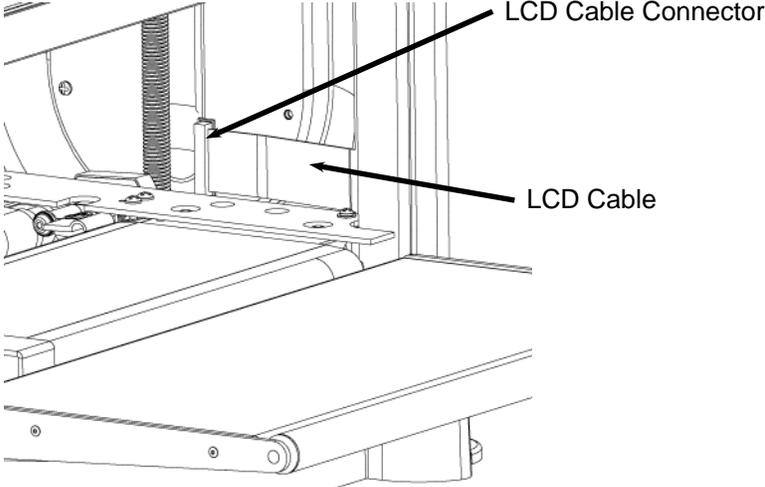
LOCATION OF CONNECTOR FOR HEAD COVER CABLE FOR THE EARLIER REVISION A AND LATER REVISION B MACHINES
